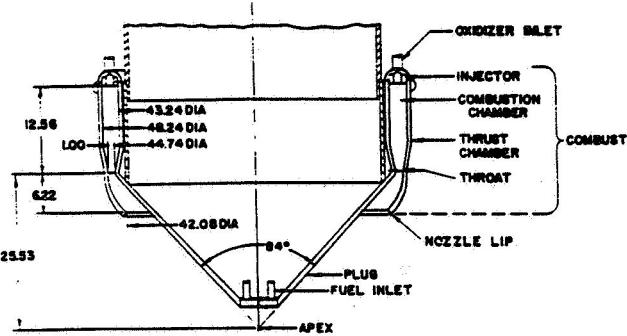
50 Klb Plug Nozzle Configuration (Dimensions in inches) (from Ref. [9])
